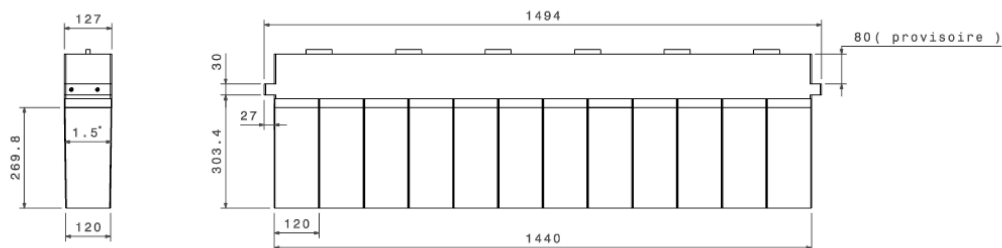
Strip module layout showing dimensions and the 1.5 degree taper.
